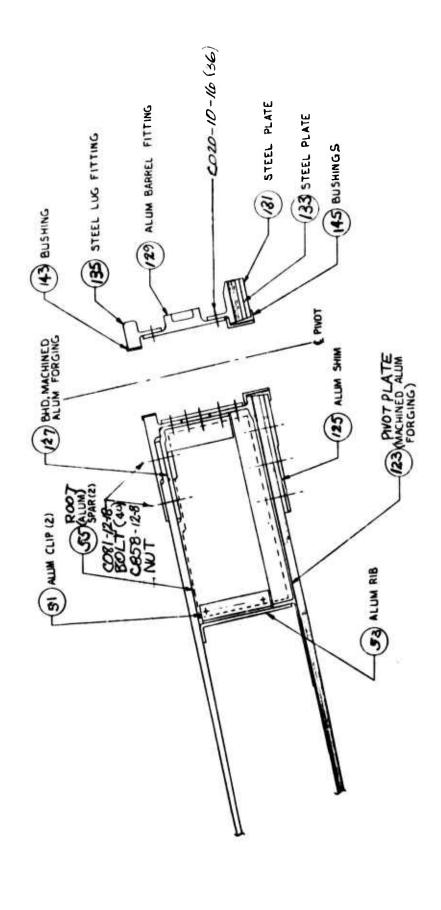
633RW001 Pivot Fitting (Sheet 2 of 2)
